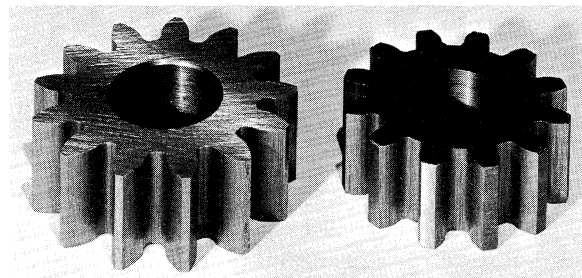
Gear-Shaped 5-DP, 20°-PA, 13-tooth gear, left, produced by a 20-tooth, 4½-in. OD shaper cutter; compared with a 5/7-DP, 20°-PA, 12-tooth gear, right, produced by a 15-tooth, 3.325-in. OD cutter.
